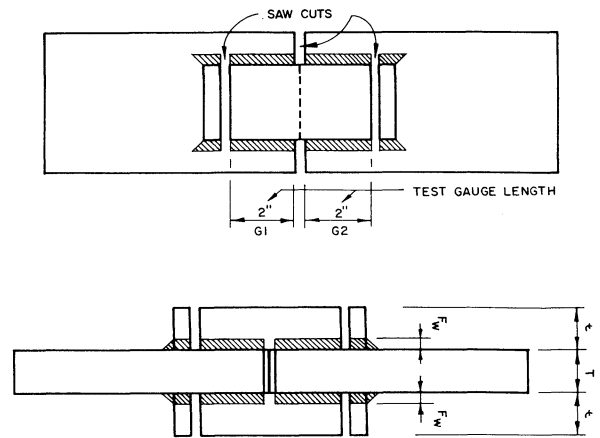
Longitudinal fillet weld test with dimension schedule as follows:
